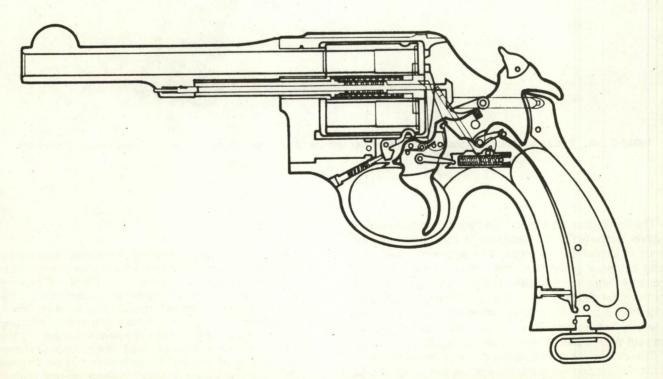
The lock mechanism of the .45 caliber Smith & Wesson Model 1917 service revolver. (Jimbo)
